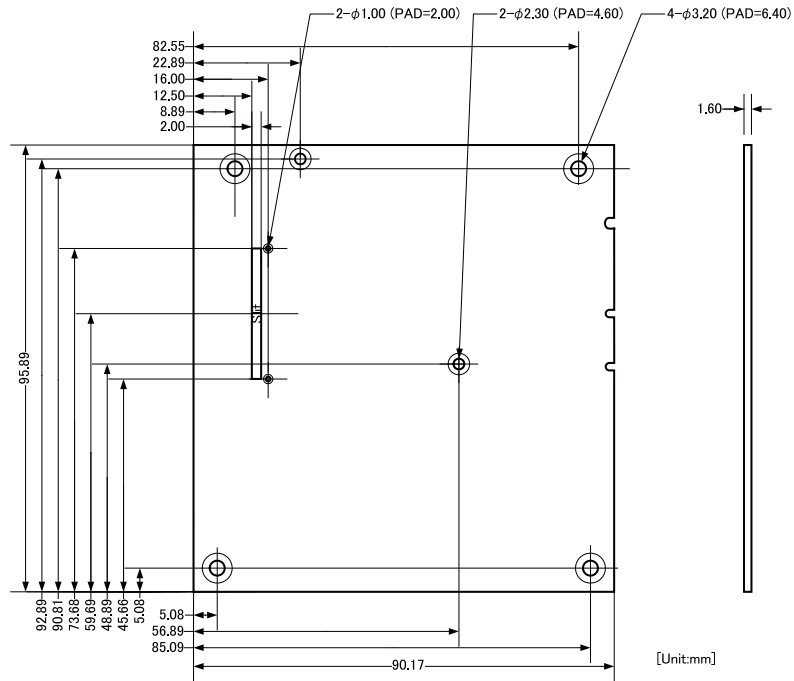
Armadillo-460 Board Outline and Fixing Hole Measurements
